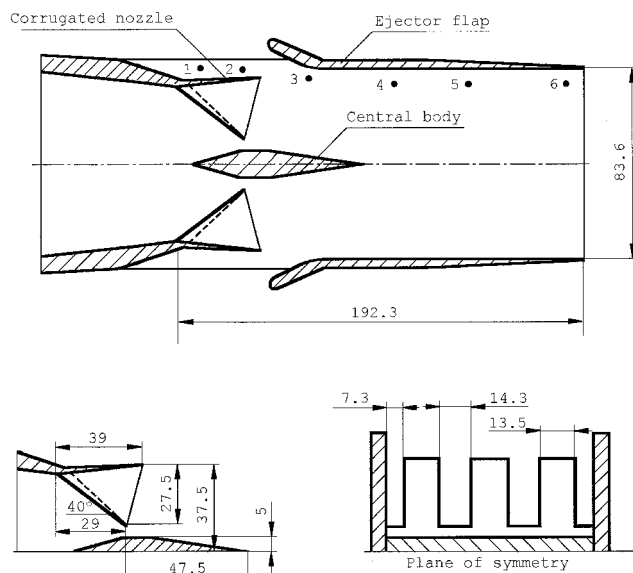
Sketch of the nozzle model (all dimensions are given in millimeters).
